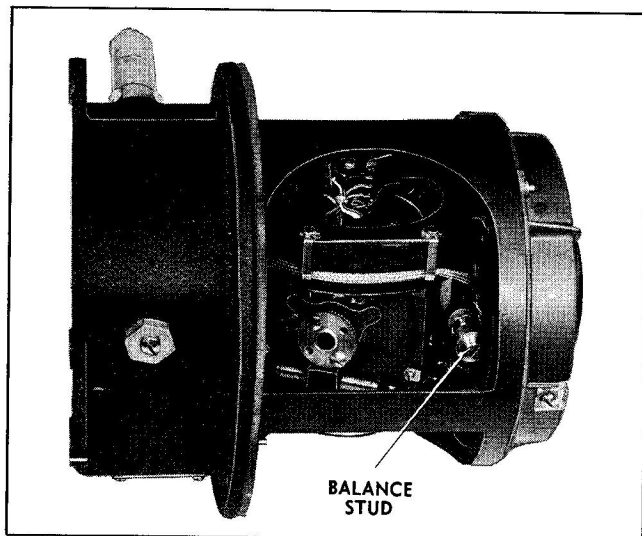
Static Balancing of Gyro and Vertical Ring Assembly - Housing Axis Vertical
